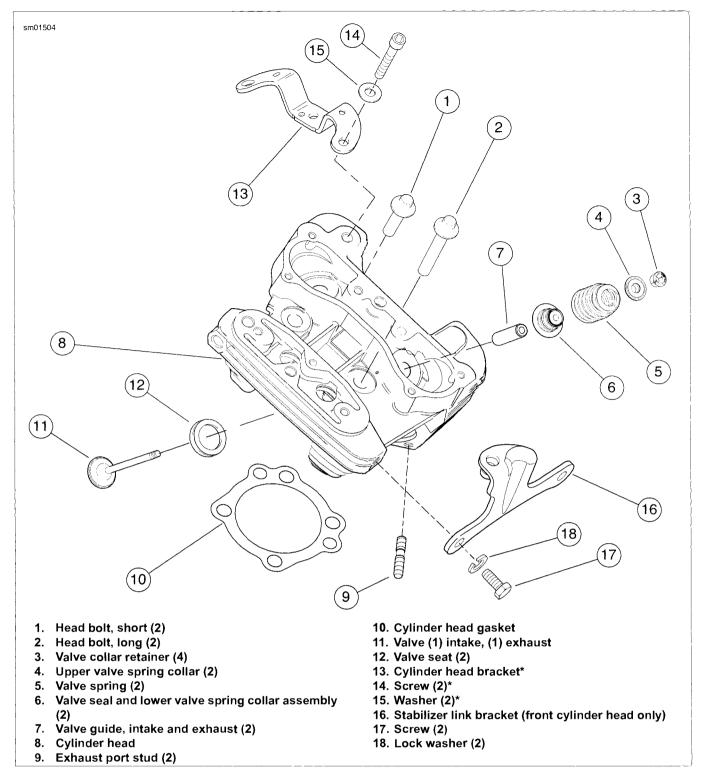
Cylinder Head Assembly (* side mounted horn)
